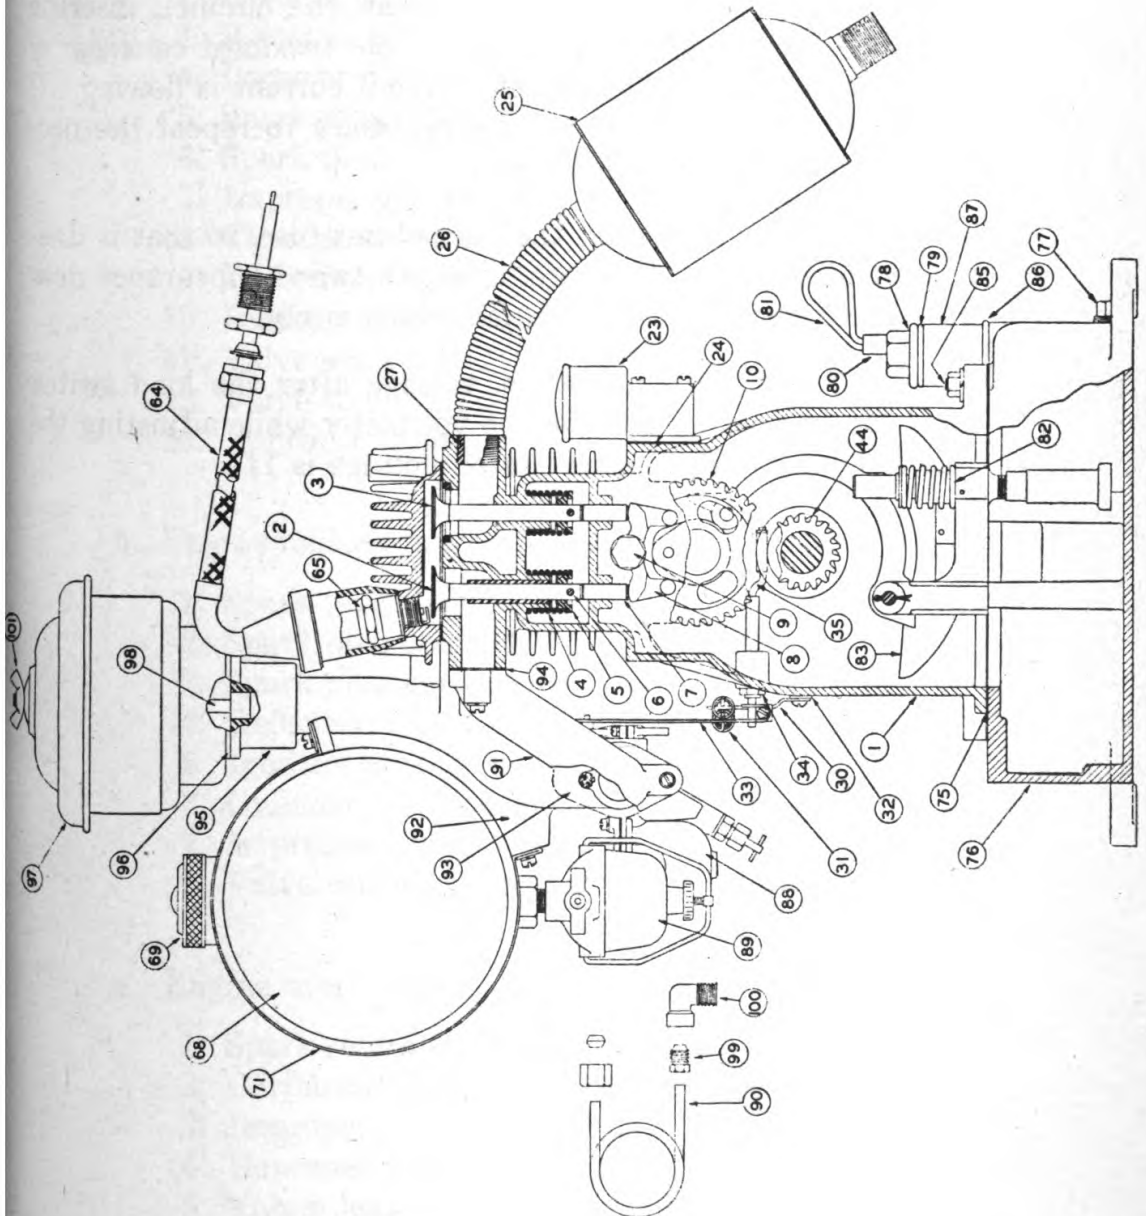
Cross-sectional Drawing, Power Unit PE-82-E
